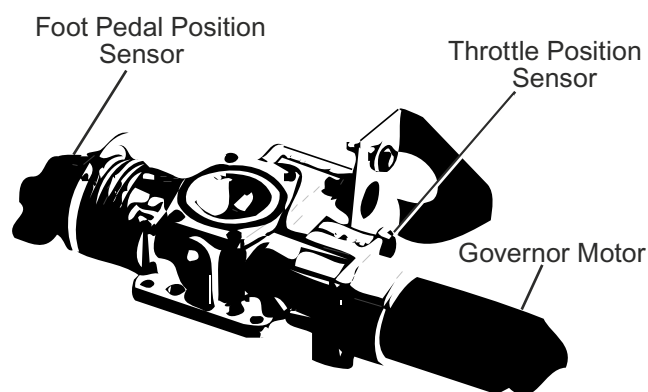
Throttle control device “LPG Drive by cable throttle body assembly”
